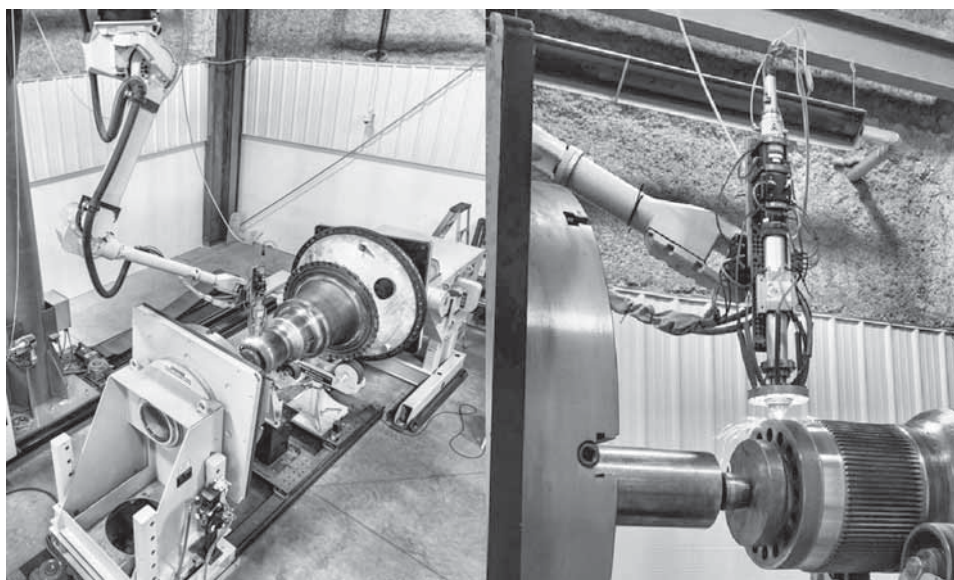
Photos showing a typical laser cladding set-up. Left: Overview showing a large mining component being manipulated with CNC relative to a robotic laser assembly. Right: Close-up of cladding head with co-axial powder delivery.
